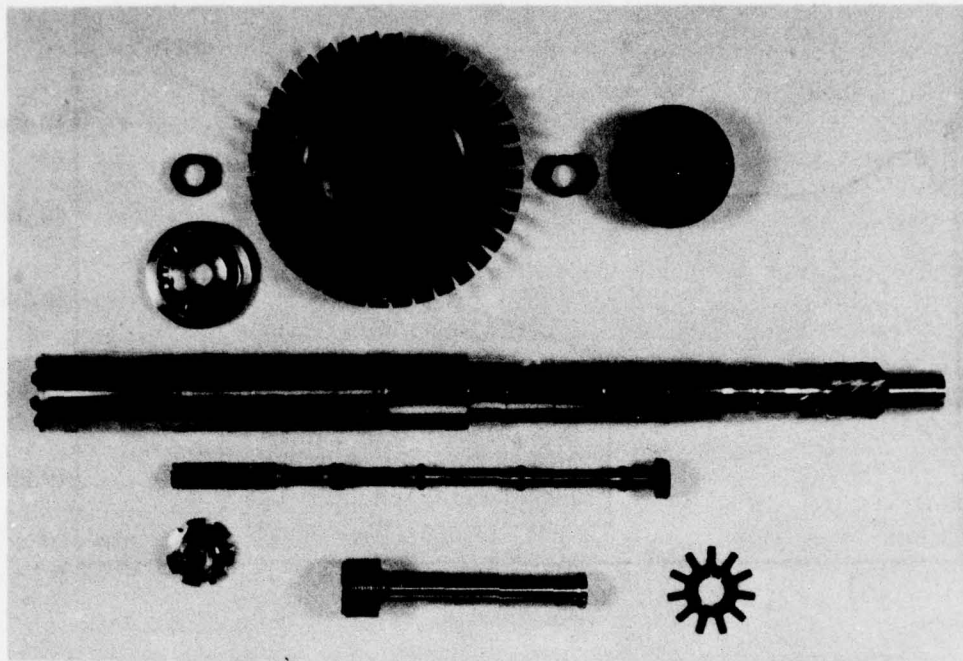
Ceramic Turbine Rotor 1195, Attachment Hardware and Main Shaft
